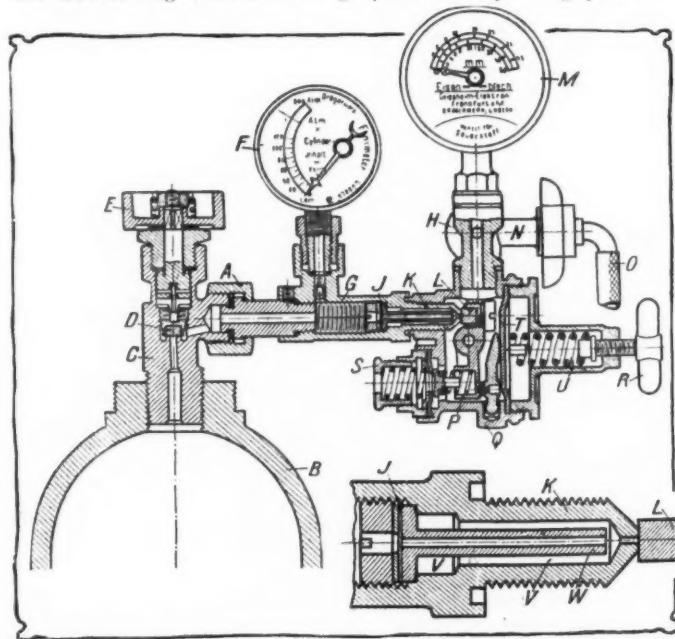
Construction of reducing-valve with pressure gauges used with oxygen bottles. Fig. 2—Detail of the latest improvement, which obviates explosions and self-ignition of valve parts
